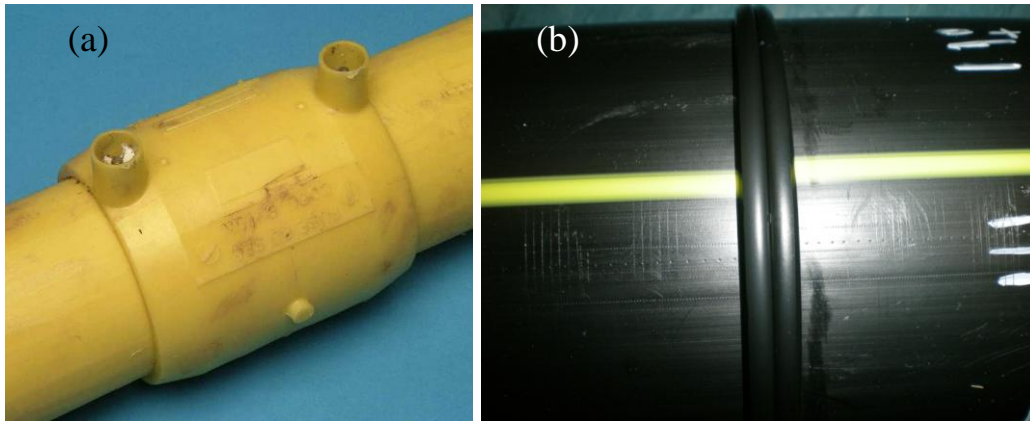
(a) An EF pipe joint. (b) A BF pipe joint with the outer surface weld bead.
